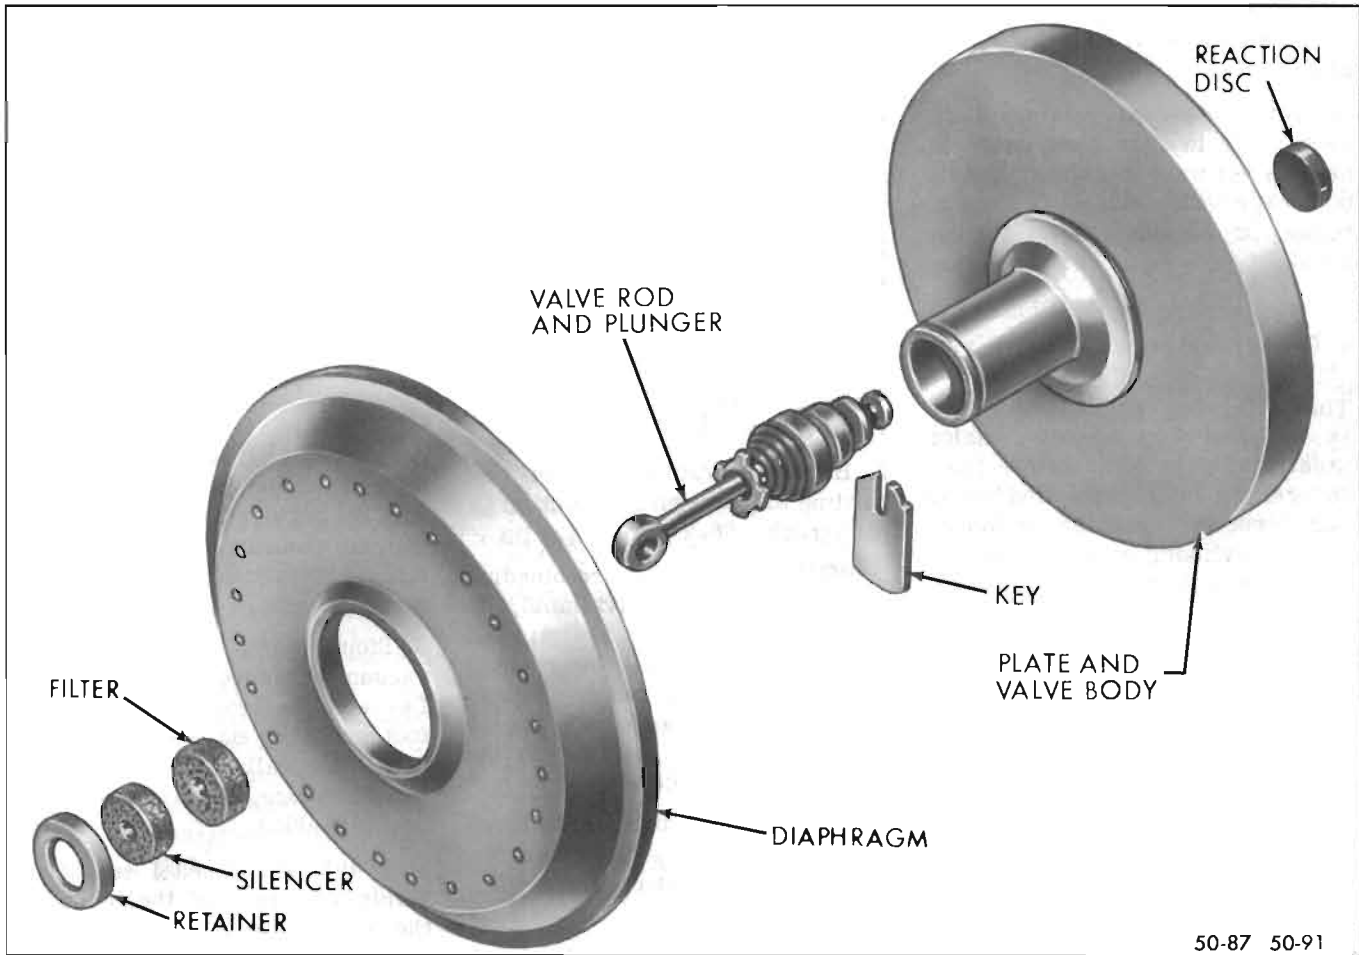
Assembly of Plate and Valve Body, Valve Rod and Plunger, Key, Diaphragm and Air Filter
